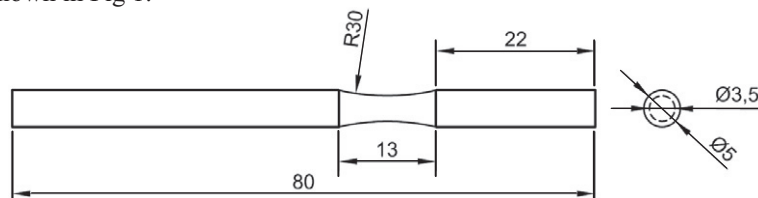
Dimensions and geometry of the specimen used for the fatigue tests (in millimeters)
